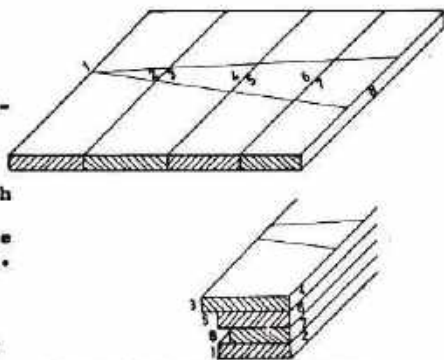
PROPER ARRANGEMENT AND MARKING OF BOARDS FOR EDGE GLUING
